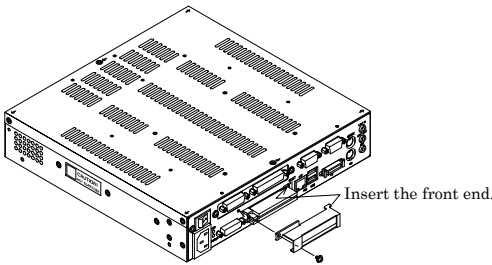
Attaching the Metal Brace to Keep the Card in Place
